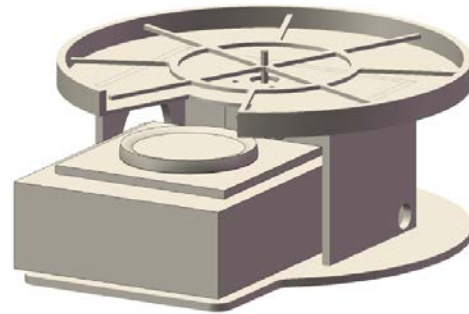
SolidWorks assembly model of the main chassis with motor and scale
